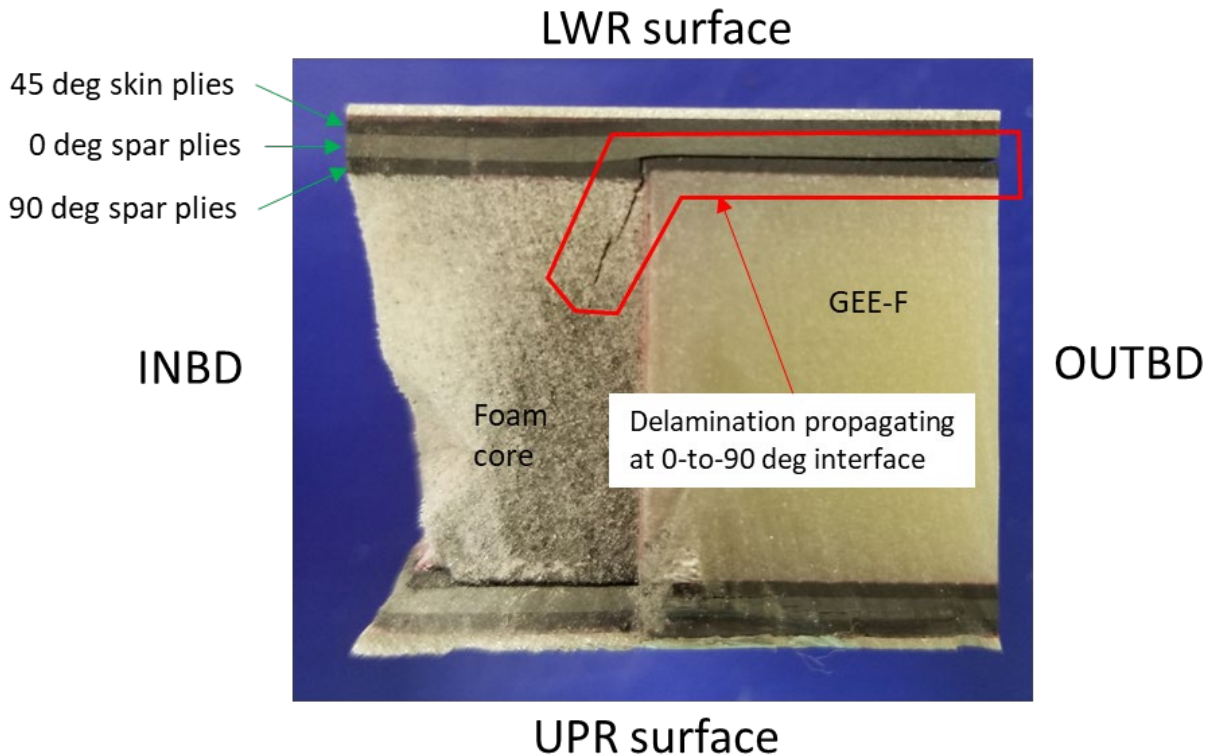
Test Specimen Cross-Section Showing Damage Progression
